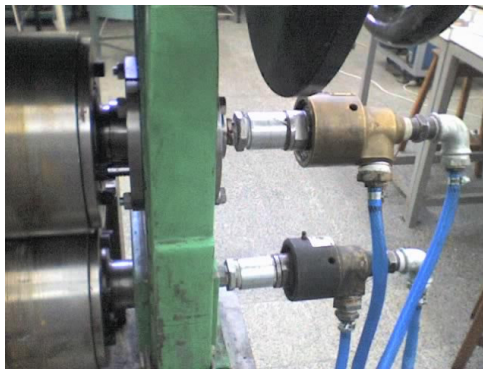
Rotary unions used in the prototype twin-roll caster
